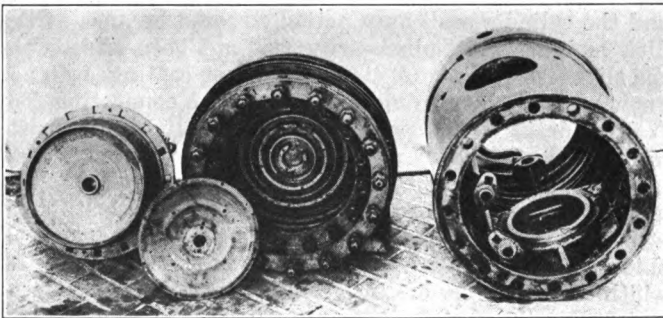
ONE OF THE DIESEL ENGINE PISTONS TAKEN APART
